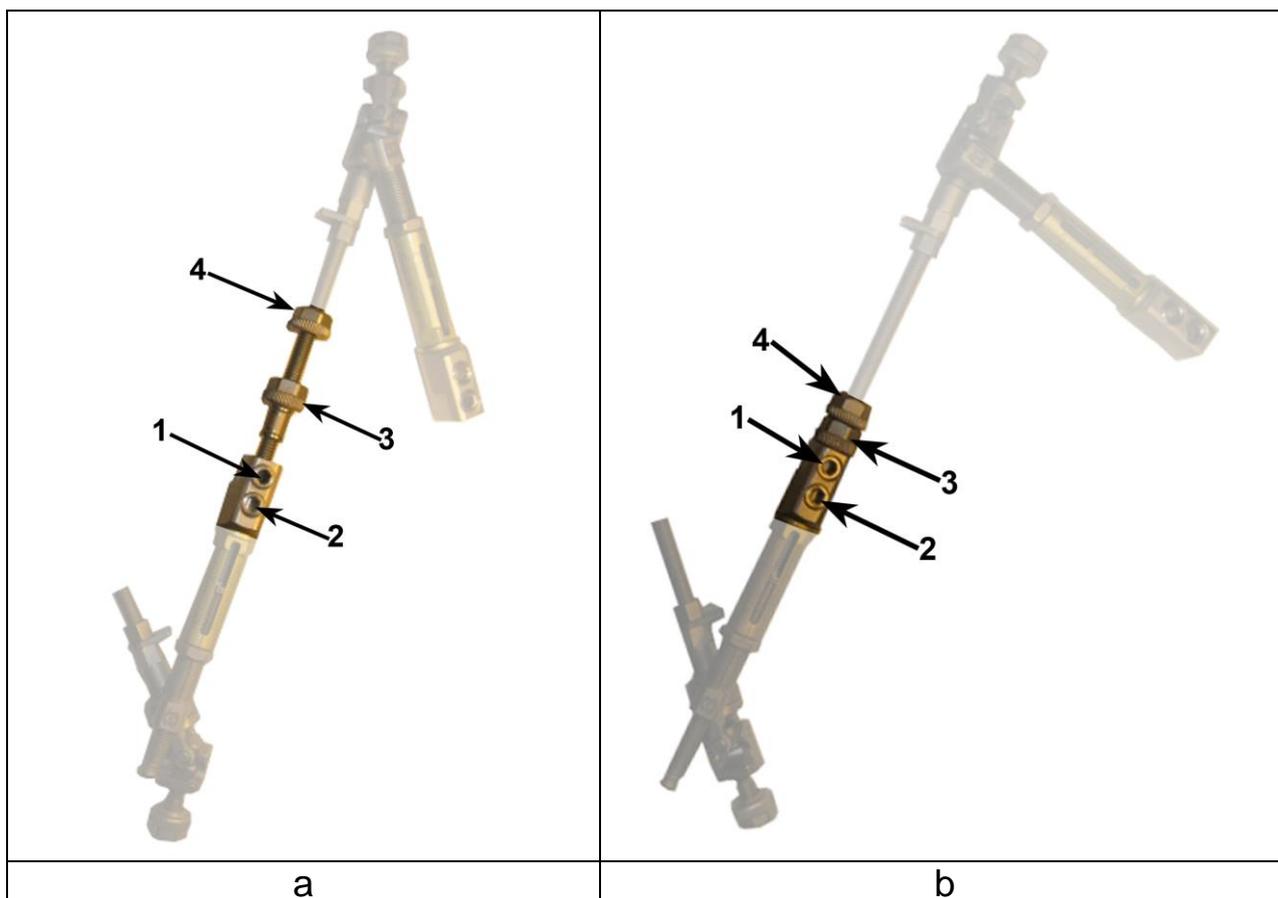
Body of strut length changing unit. a - the screw #1 is loose; connector nut is moved away from the body. b - connector nut is moved into the body, screw #1 and lock-nut are fixed. 1 - screw #1; 2 - screw #2; 3 - connector nut, 4 - lock-nut
